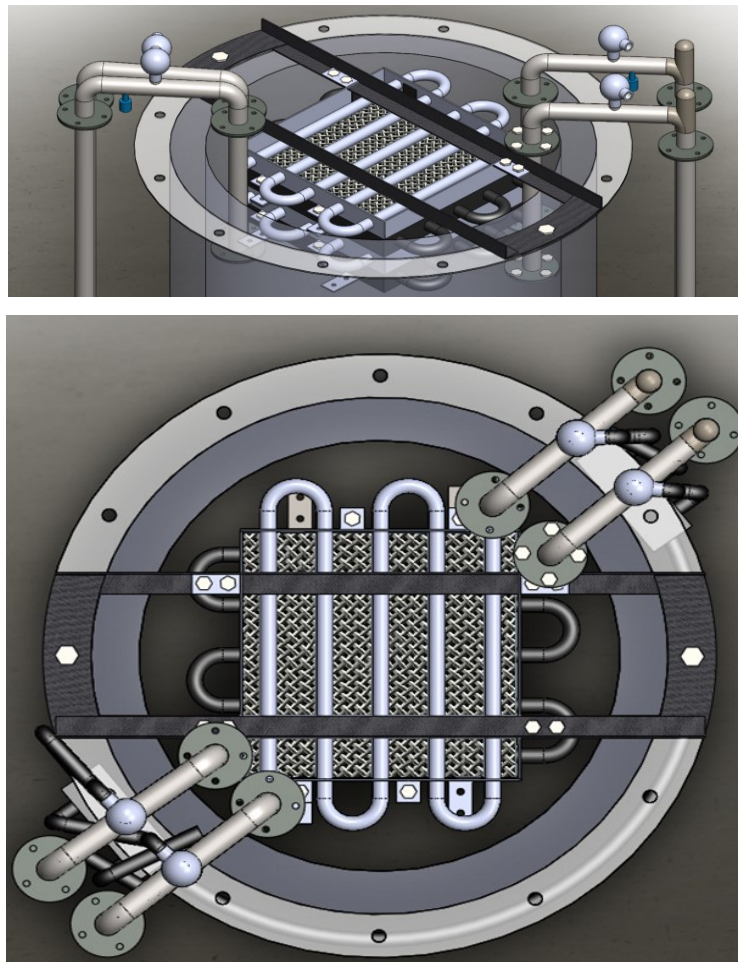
Original prototype mounting design - seated within stack, isometric view (Top) and top-down view (Bottom)
